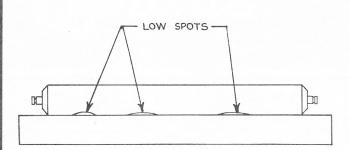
IMPRESSION ROLLER ADJUSTMENT
